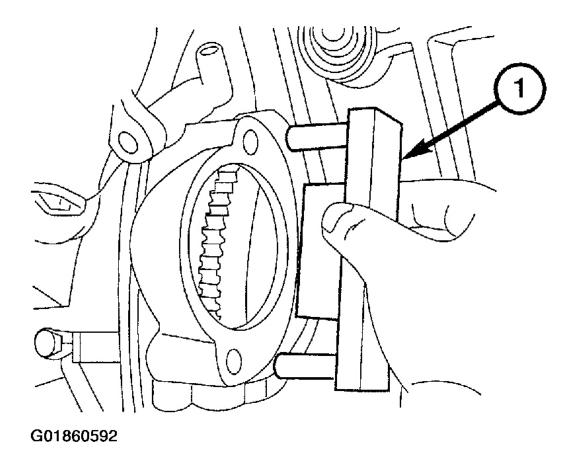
Removing Special Tool 9102 Courtesy of DAIMLERCHRYSLER CORP.
